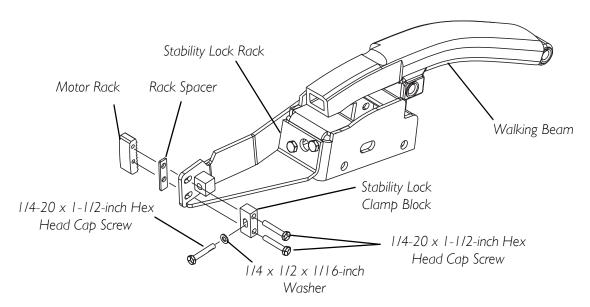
REMOVING/INSTALLING THE STABILITY LOCK HARDWARE 2-POLE OR 4-POLE MOTOR
